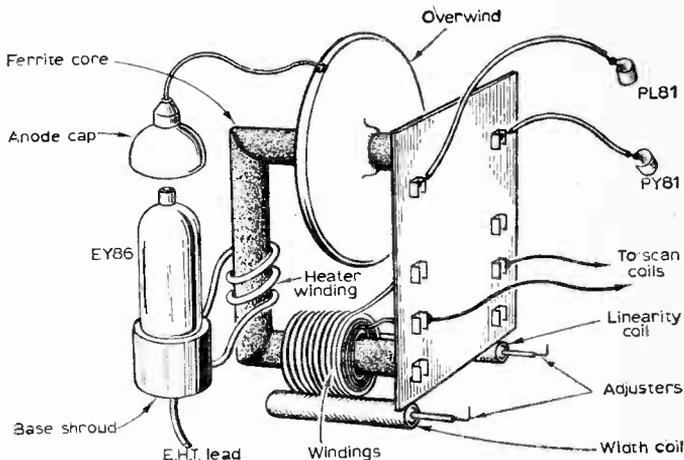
Typical line output transformer assembly, with mounting brackets, etc., omitted.
